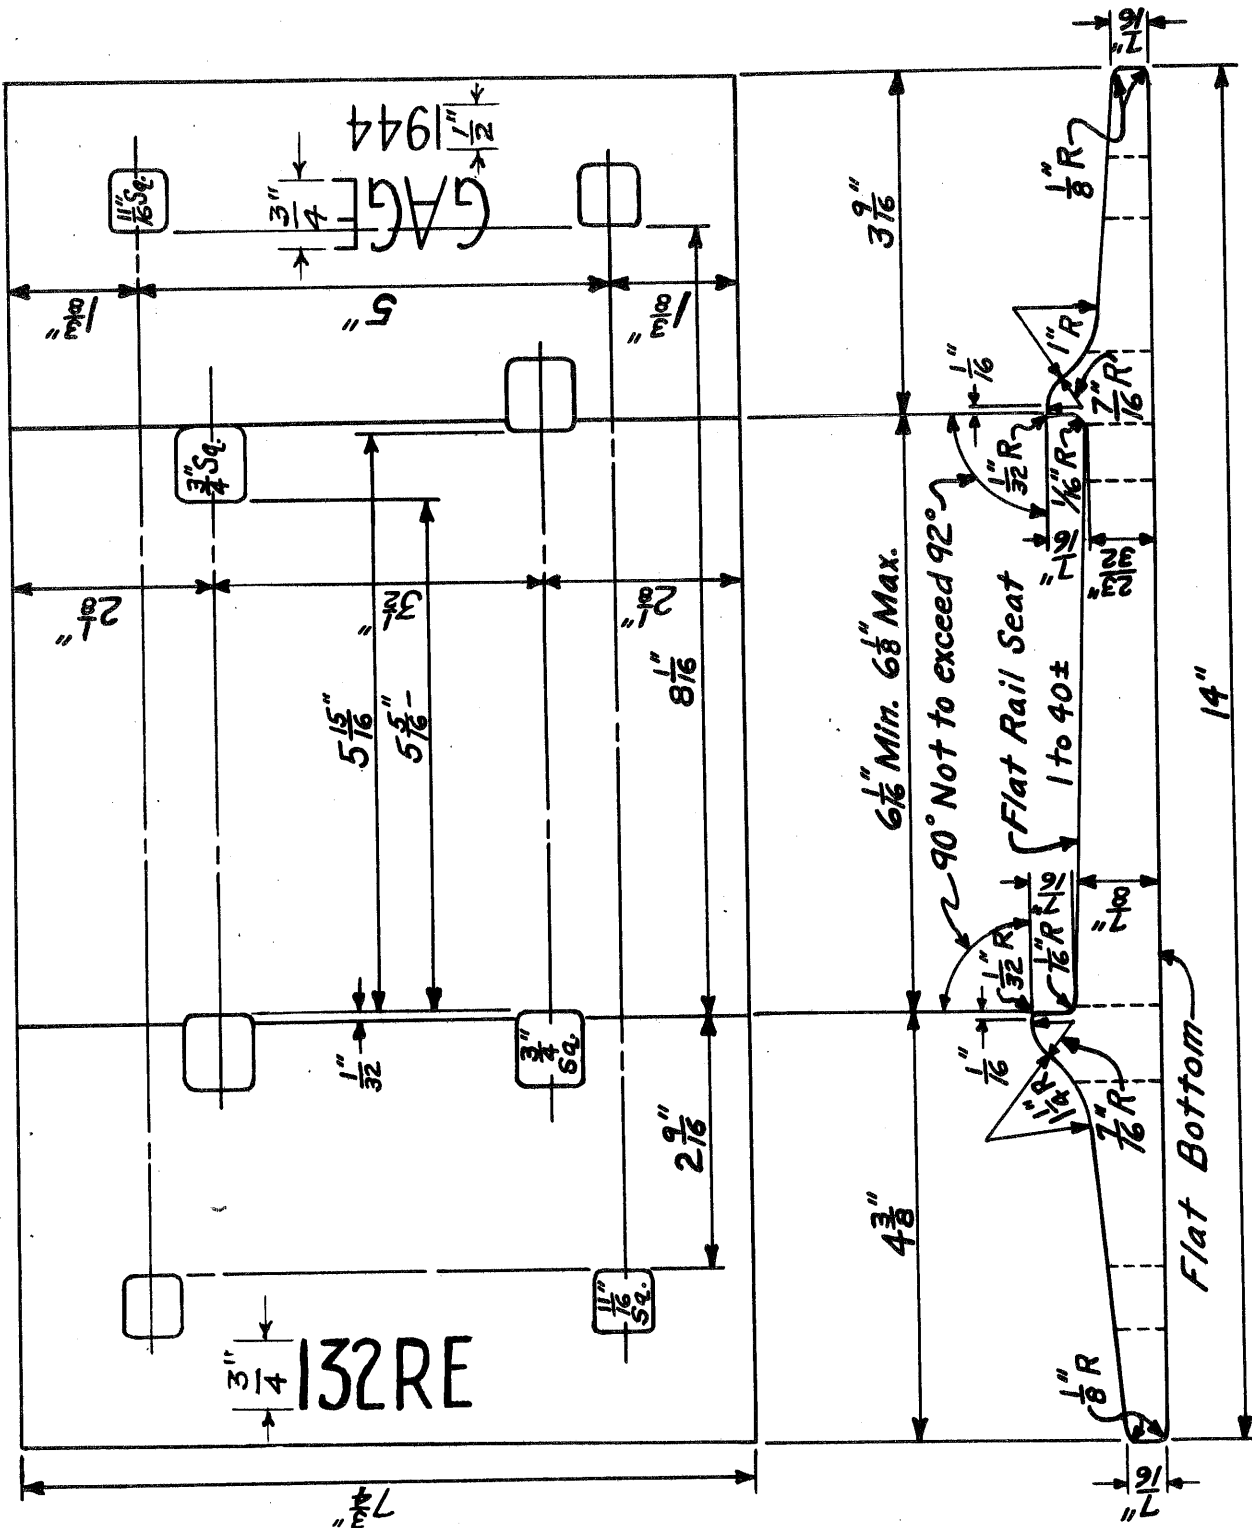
Erie Railroad Standard 13-in Outside Joint Tie Plate for 131 lb RE Rail.
